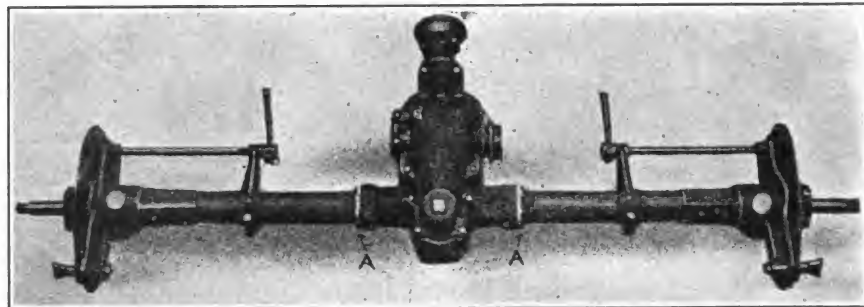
AUTOMOBILE AXLE, SHOWING AT "A" HOW STEEL AND BRONZE CAN BE WELDED TOGETHER
